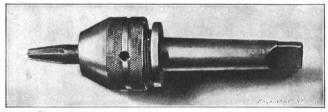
Special Cutter Chuck for the Die-sinking Machine
